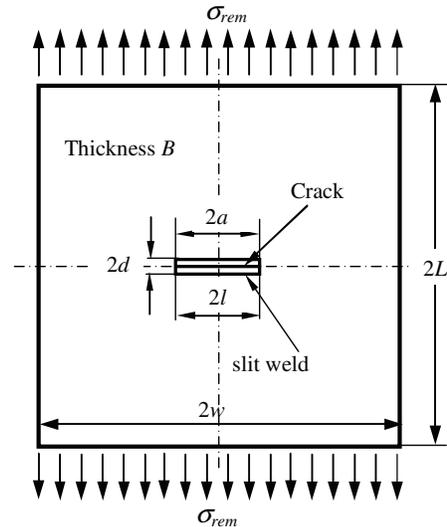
The geometry of a centre cracked plate (CCP) with a crack in a slit-weld
